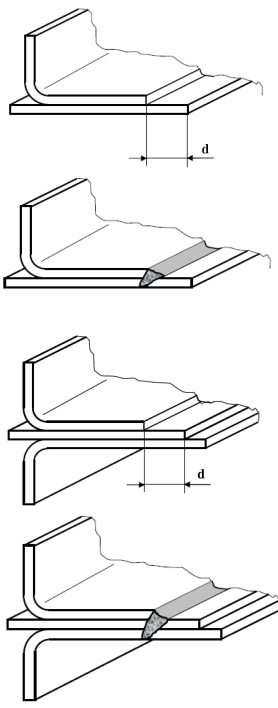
Typical Shapes of Stitch Welds
